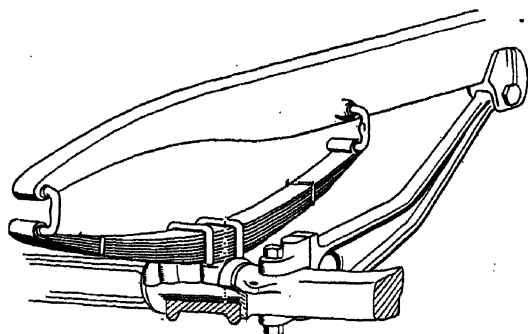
Springing Method Employing Radius Rod, both ends of Spring being Shackled.
